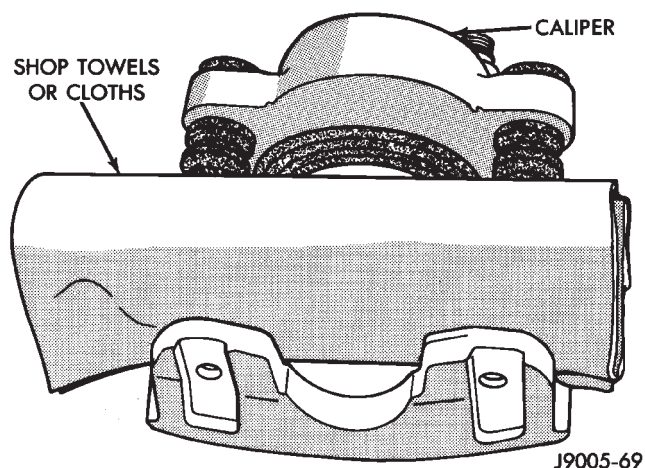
Padding Caliper Interior To Protect Piston During Removal
